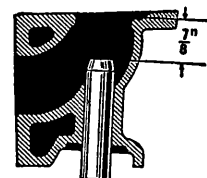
Position of valve guides in 1951-52 four-cylinder engine
